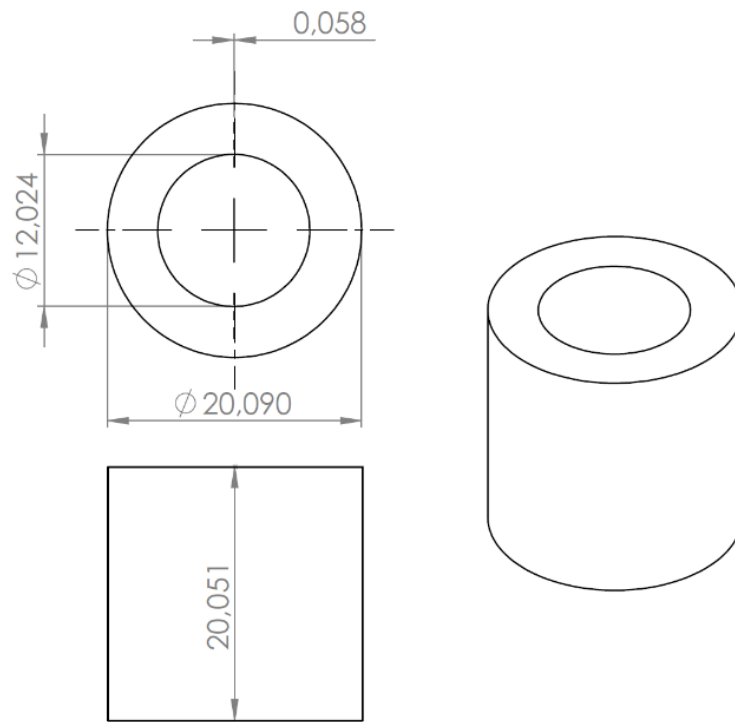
Drawing of cylinder with dimensions and model of cylinder
